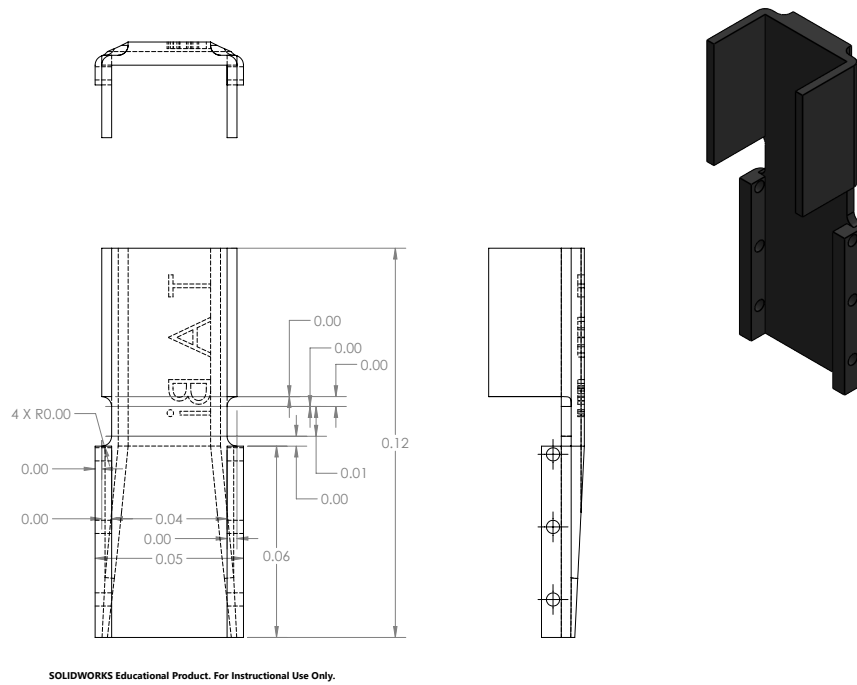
Protective Cladding for Legs. All dimensions in inches
